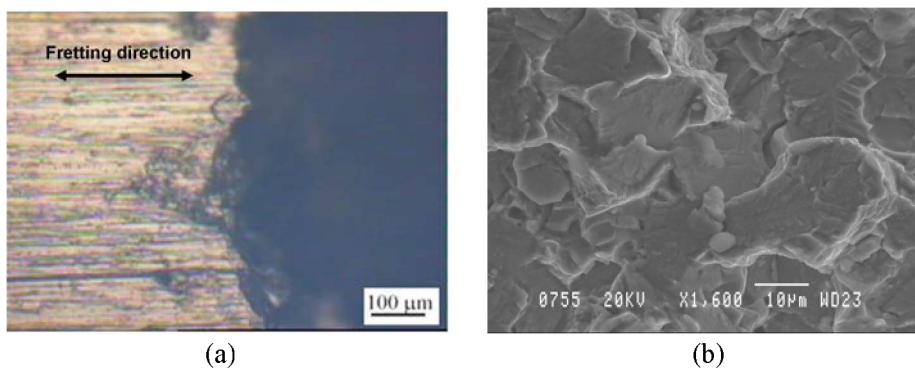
(a) Fretting fatigue failure edge (b) Fractography of thermally oxidized Ti-6Al-4V specimen at 400 MPa.
